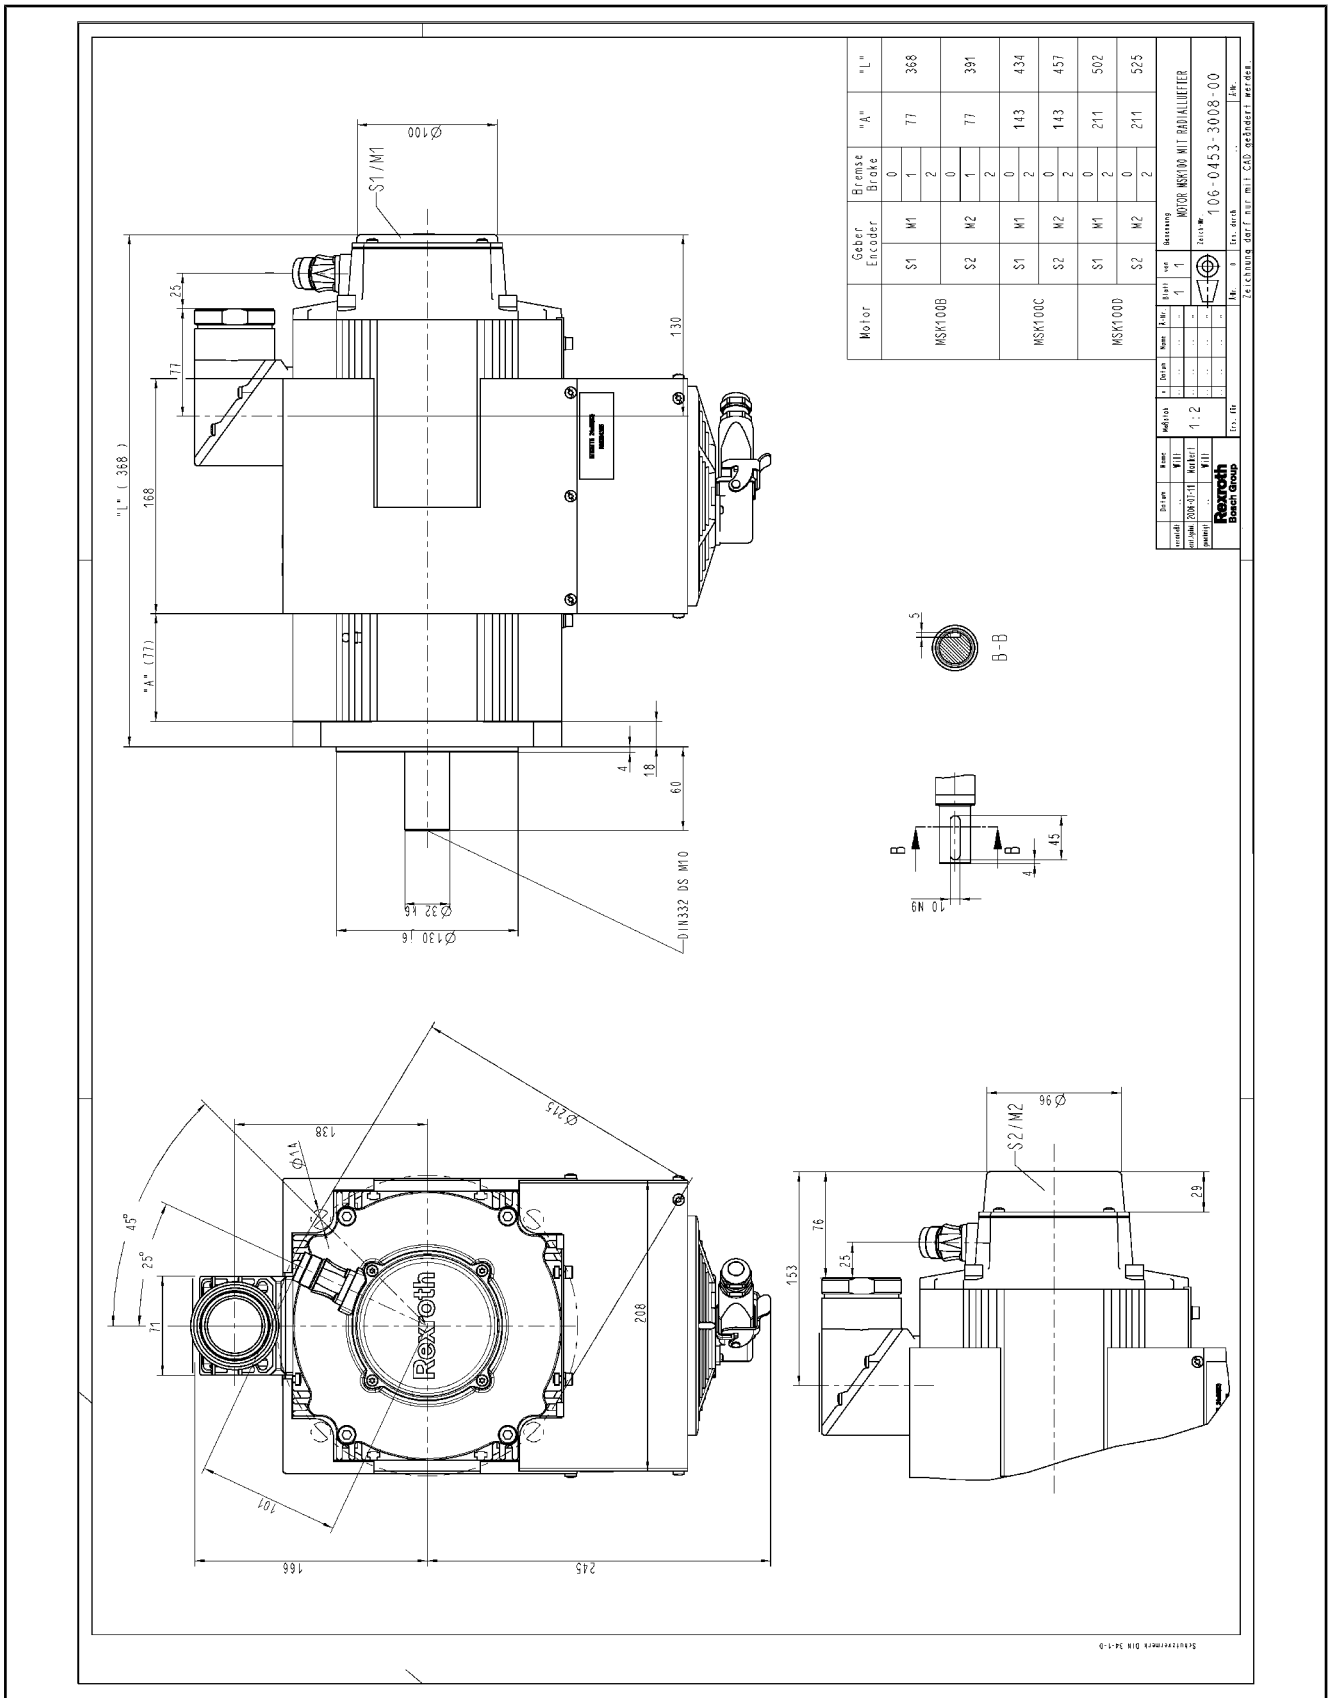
Dimension sheet MSK100 with radial fan unit
